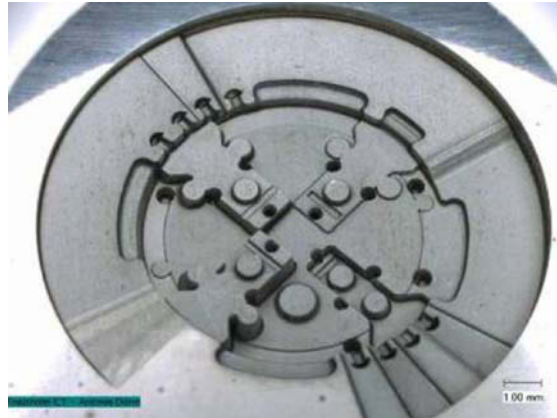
Laser manufactured micro-injection molding tool insert.
